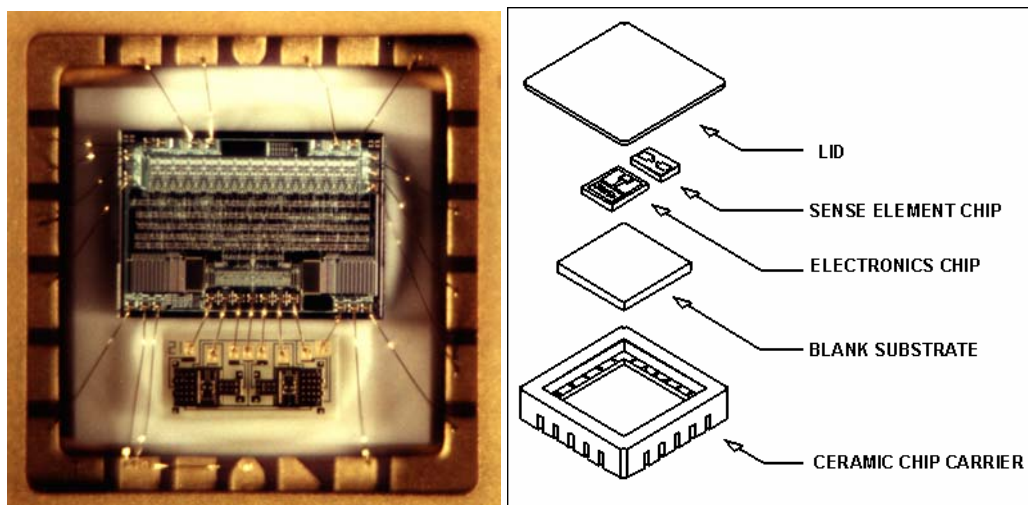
Photograph of the interior of the chip (left) and exploded schematic drawing (right).
